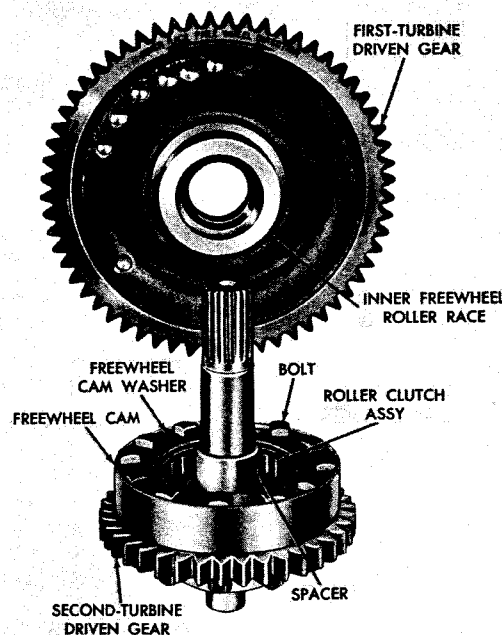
Second-turbine driven gear and freewheel unit removed from first-turbine driven gear
